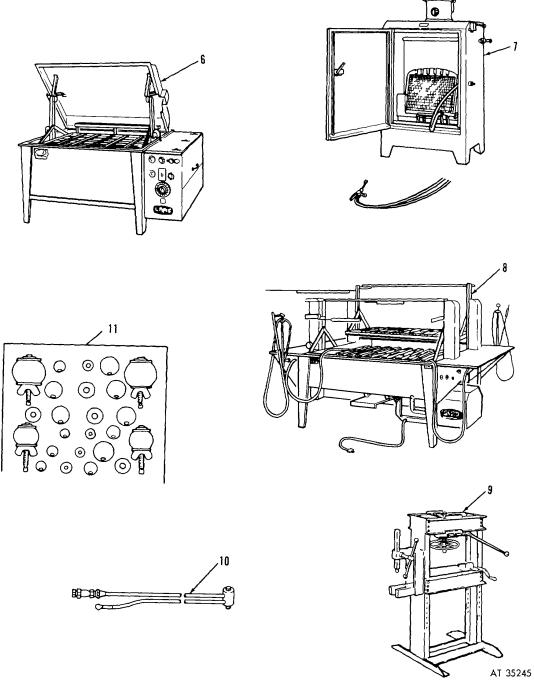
Special tools and equipment (sheet 2 of 2)
